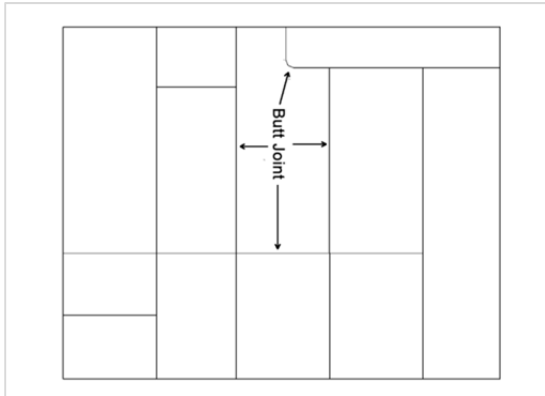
Example of Several Plates Welded to Form a Panel
